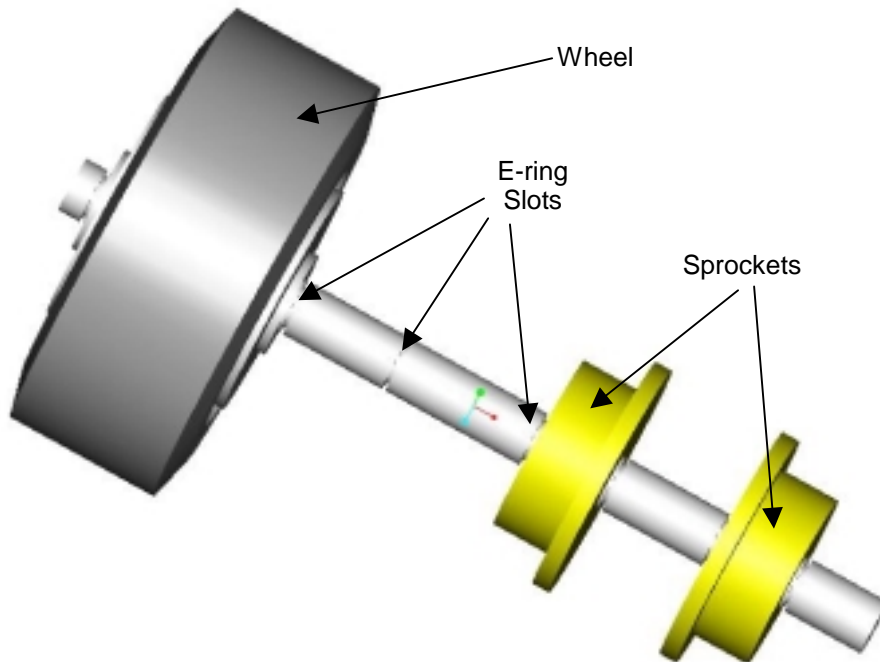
Shaft Assembly Showing Sprocket and E-Ring Slots
